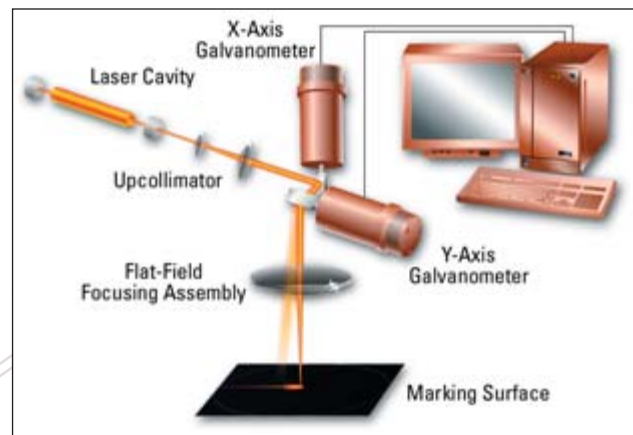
Laser set-up for marking matrix codes on PCBs.
